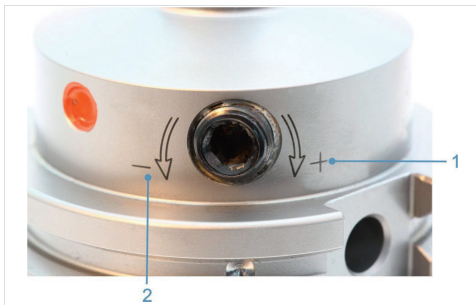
Indication of the direction of rotation for clamping and unclamping the tool
